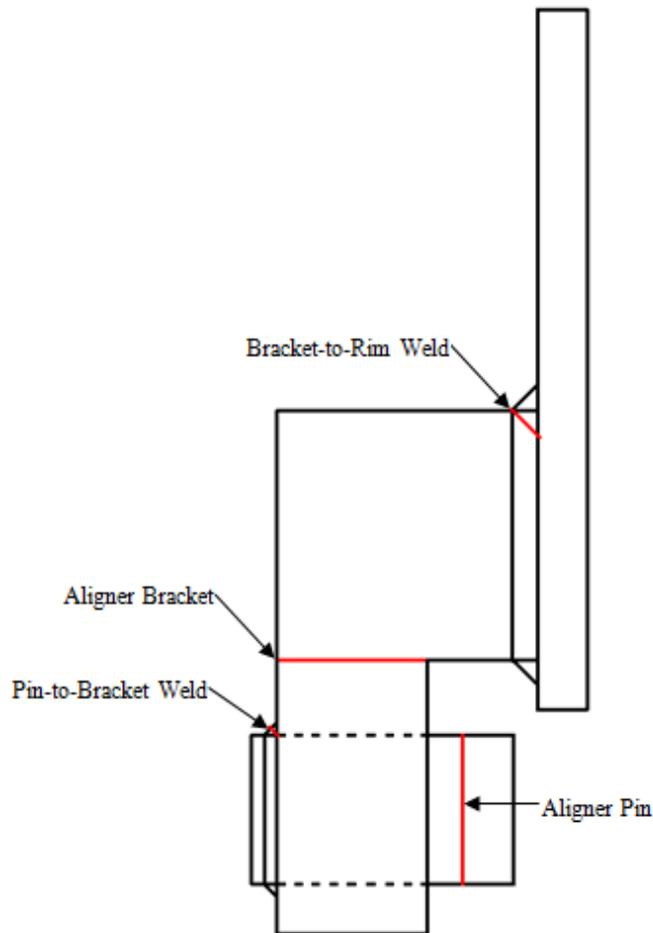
Aligner Pin Assembly Cross Sections Analyzed
